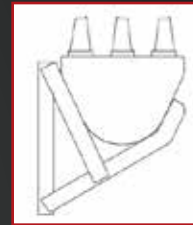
Cable Transition Module supported by Mounting Saddle
